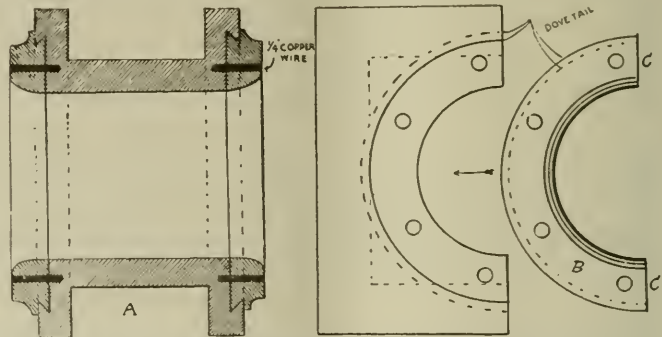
ROD BRASS WITH DOVETAIL PIECES FOR WEAR.
